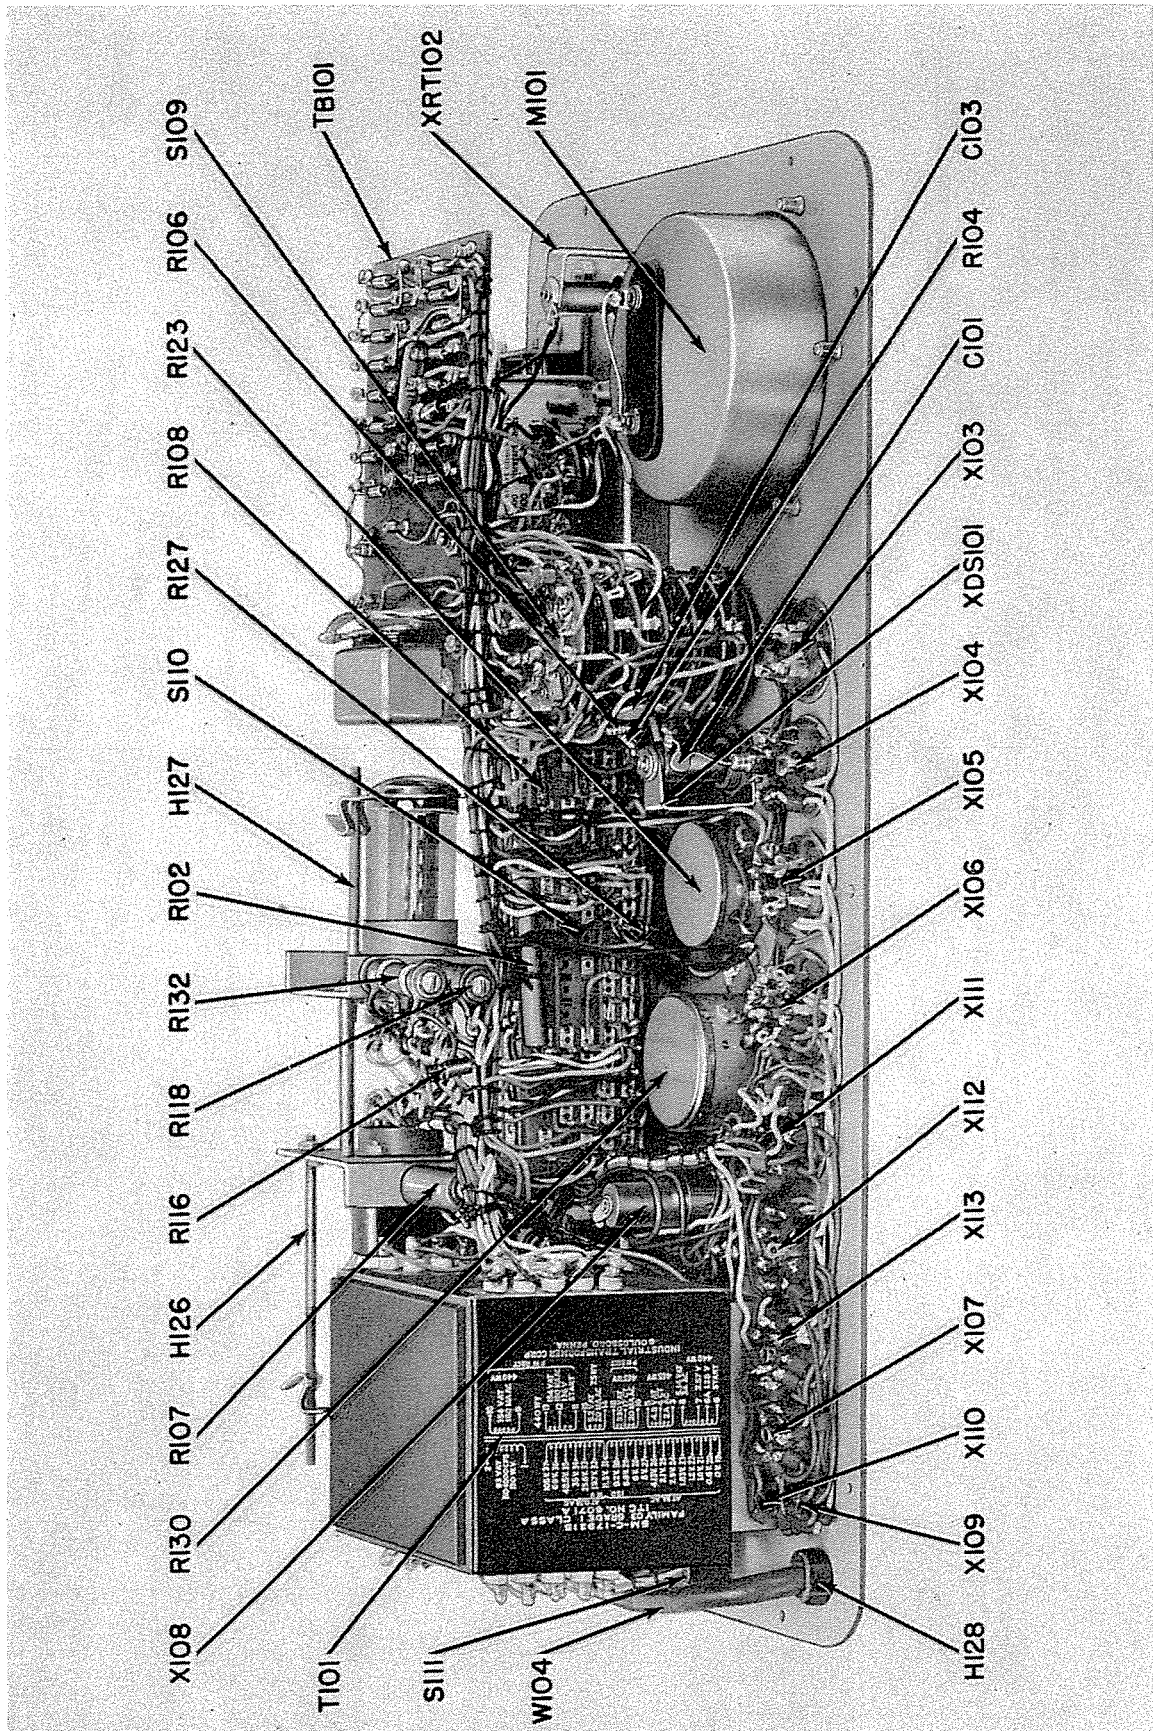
Rear View of Test Set, TV-10A/U From Top Edge of Panel
